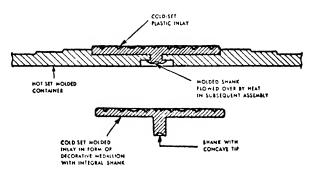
Inserting cold-set plastics inlay in molded part.
